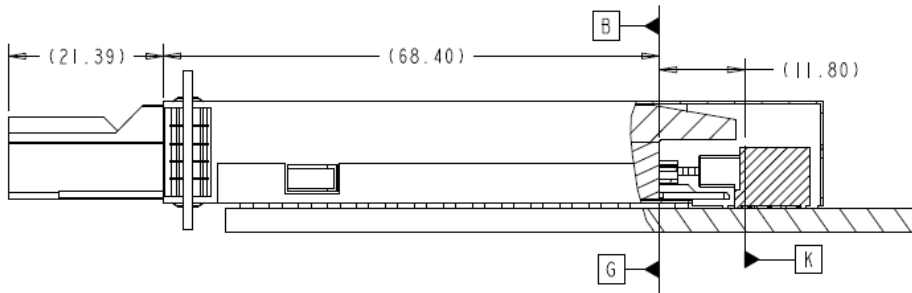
Side view of a 1x1 cage with vertical cage dimensions
